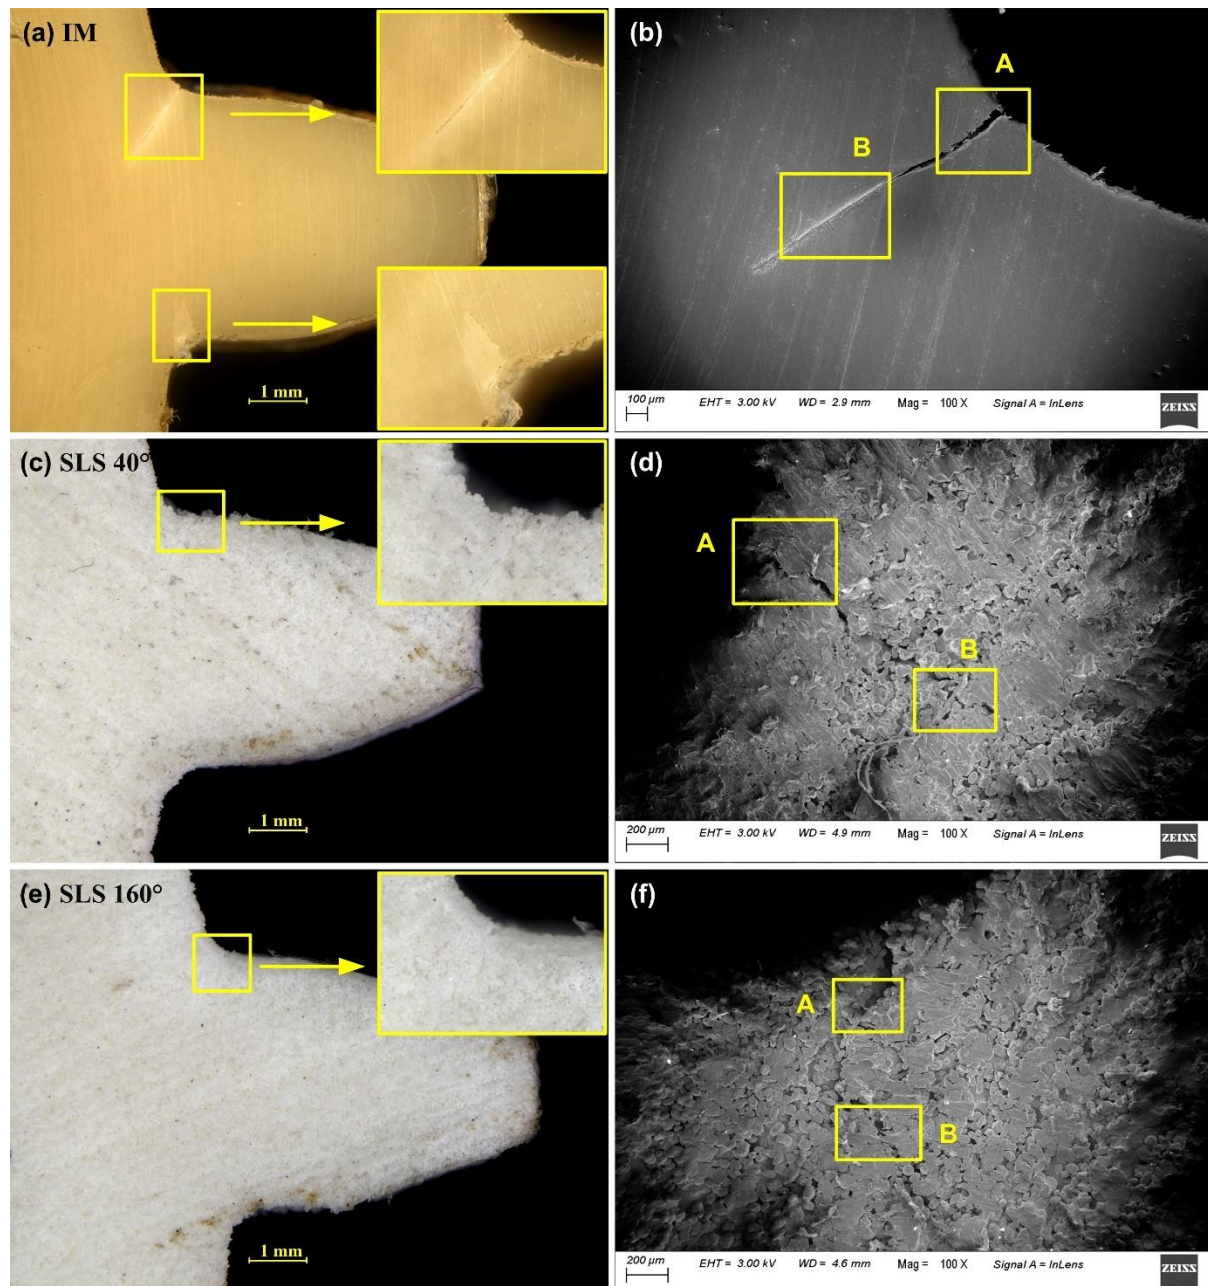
Bending fatigue cracks in test gears observed under stereomicroscope (a, c, e) and FESEM (b, d, f). (a, b) Injection-molded gear, (c, d) Selective laser sintered gear tooth 40° configuration and (e, f) Selective laser sintered gear tooth 160° configuration.
